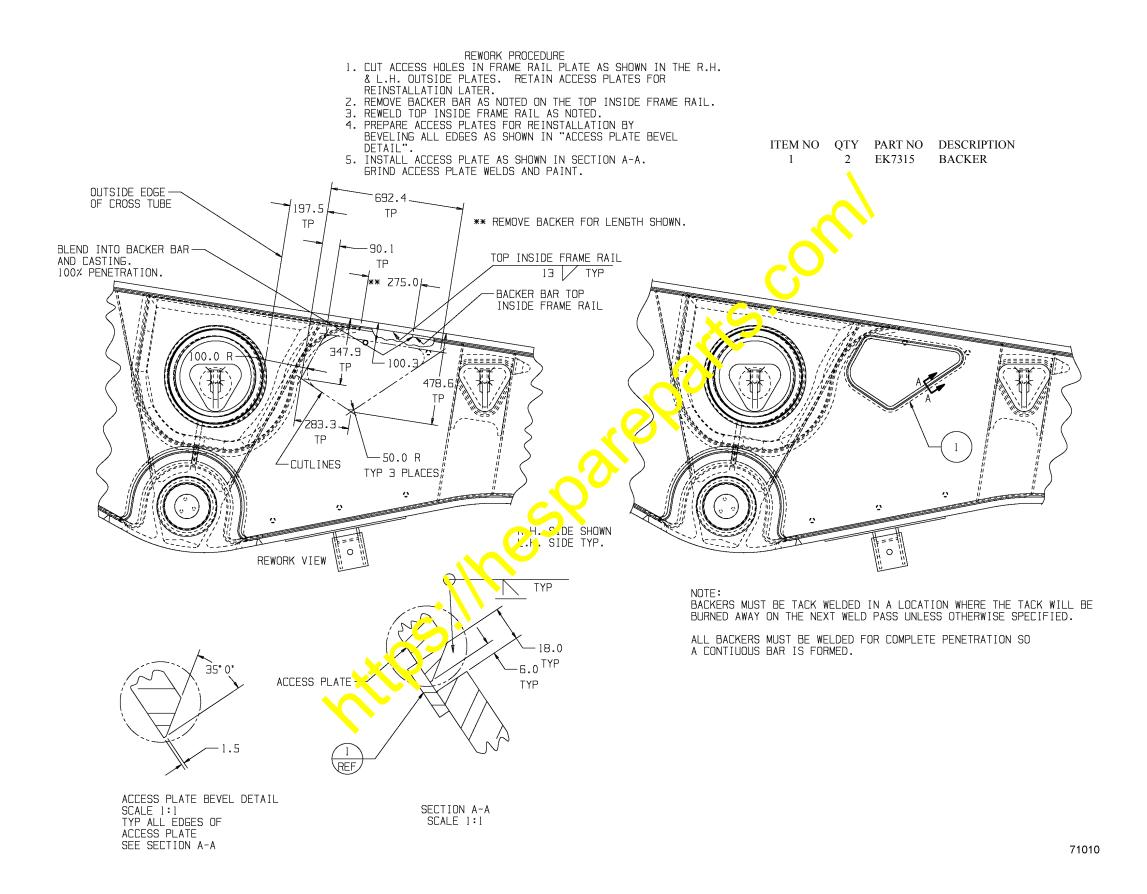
FRAME RAIL CASTING REWORK DRAWING (EK7314)
